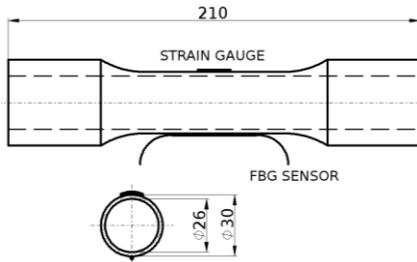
Specimen dimensions with configuration of the sensors. [8].
